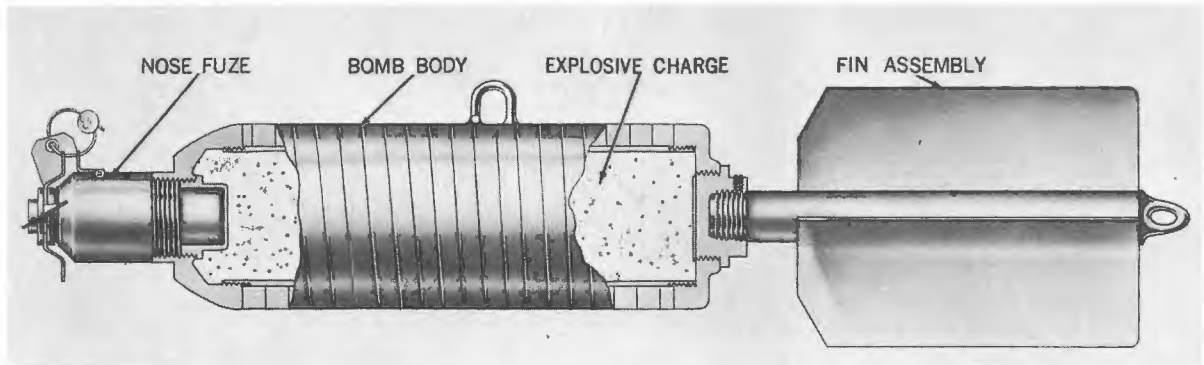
20-lb Frag Bomb AN-M41A1, Cutaway View.
